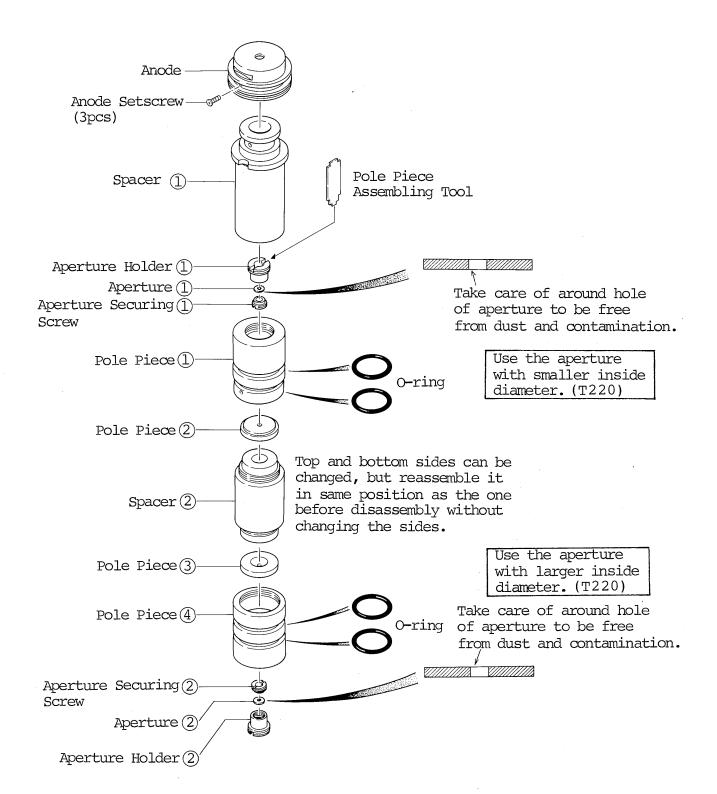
Disassembling Pole Piece of Condenser Lens
